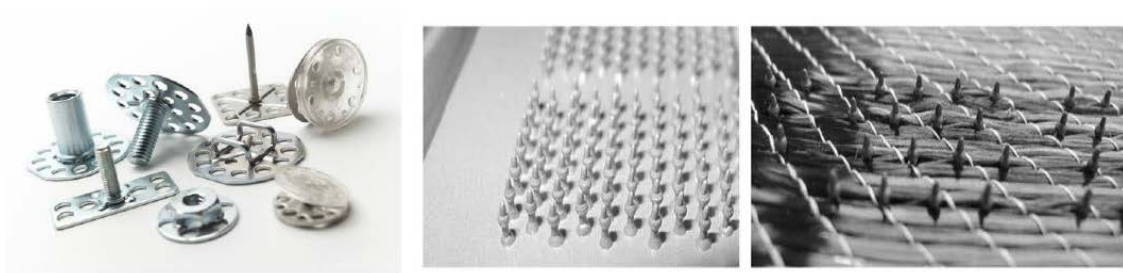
Big head threaded inserts and spiked inserts [62] [63]
